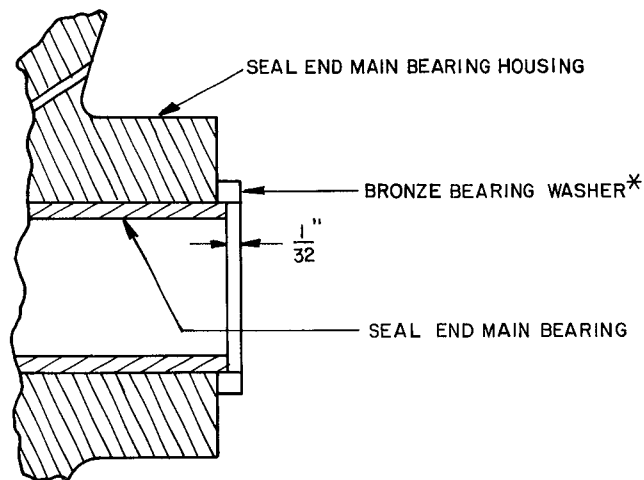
Installing 5F40 or 5F60 Seal End Main Bearing
